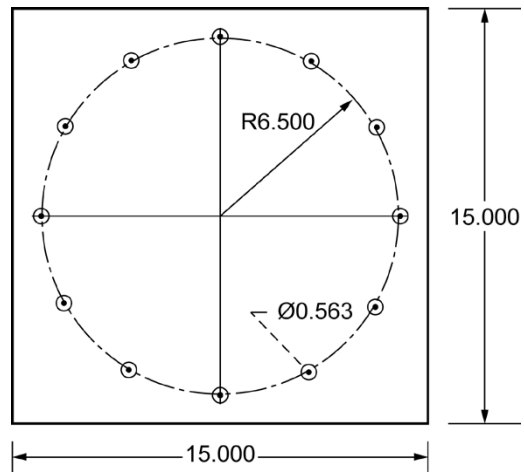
Small Panel Test Specimen (dimensions in inches).
